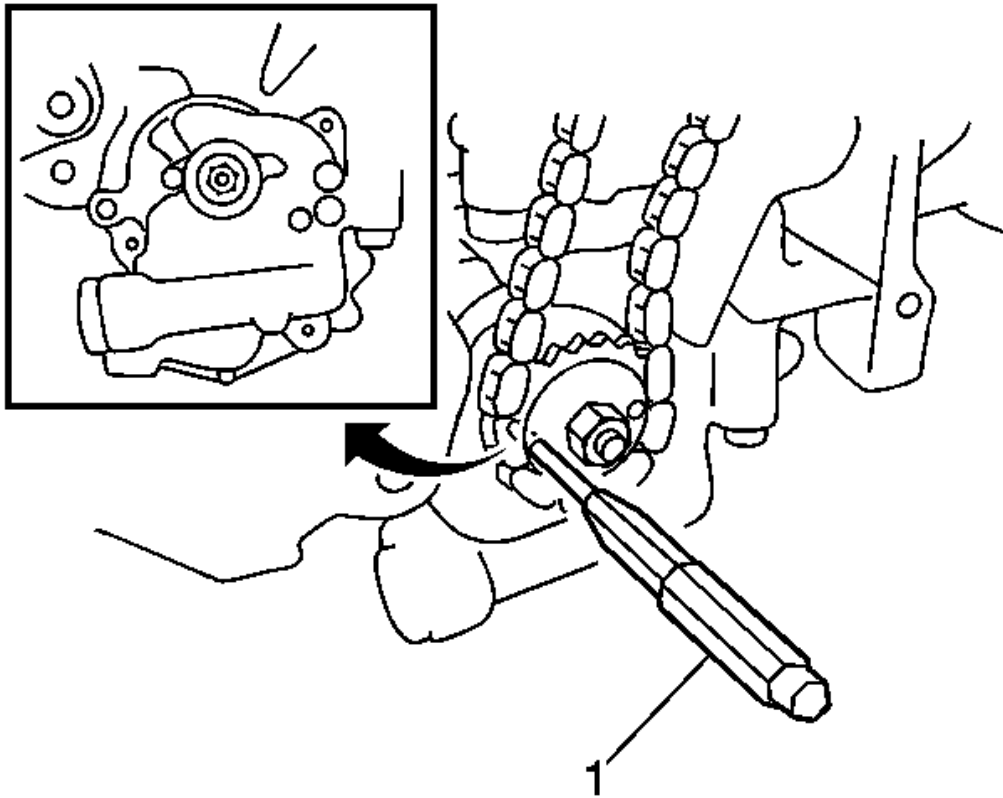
View Of Locking Oil Pump Drive Shaft Sprocket In Position
